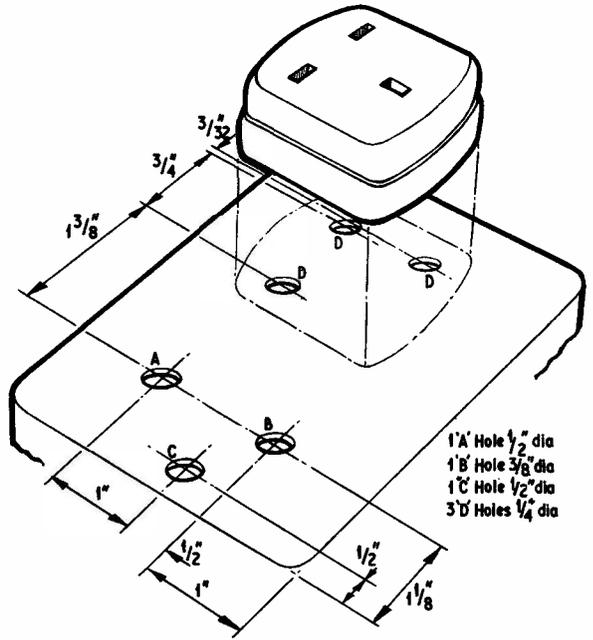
Position of controls and socket on the die-cast box. Location of feed-through holes (D) will depend on the design and type of socket. Hole C is only needed when a separate fuse is fitted
